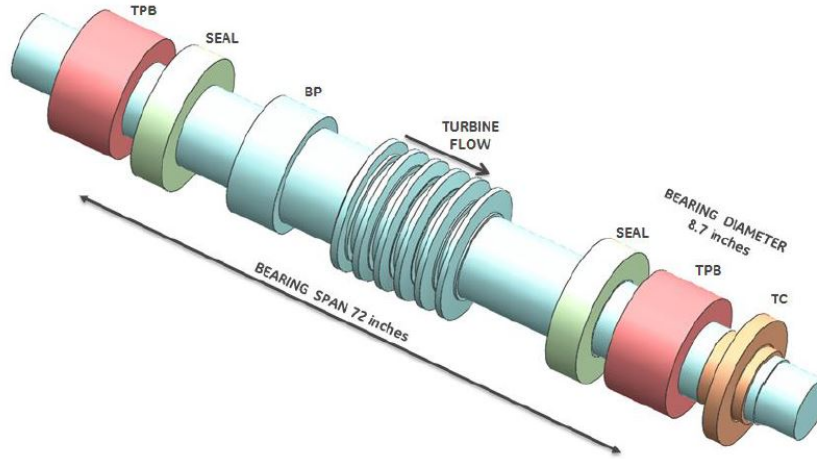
Solid model representation of the rotor design of 50 MWe turbine with tilt pad bearing (TPB), turbine end seal (SEAL), balance piston (BP) and thrust collar( TC) [135].
